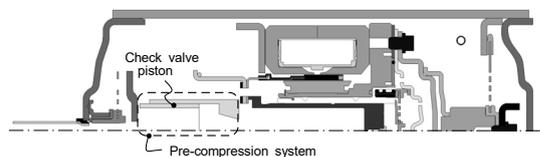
Schematic of a check valve piston attached to a linear compressor
